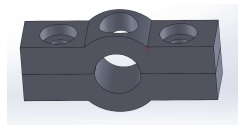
Solidworks CAD of adapter to attach the Webcam to the endoscope shaft.
